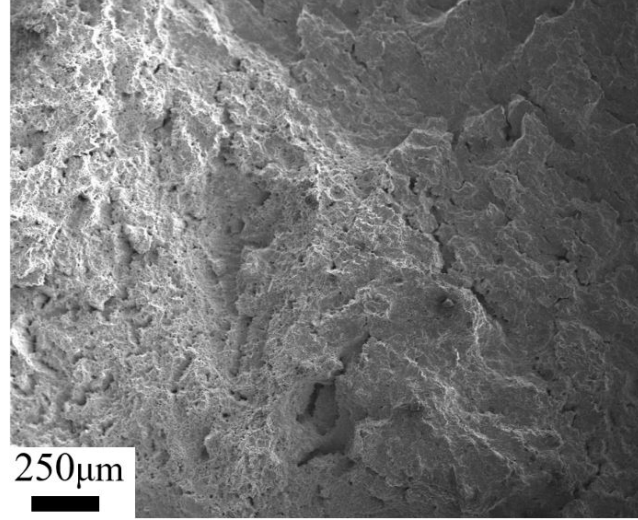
General view of the fatigue fracture surface of condition R 316L sample broken in 1.400.365 cycles, at 75% of σ_{yield} .
